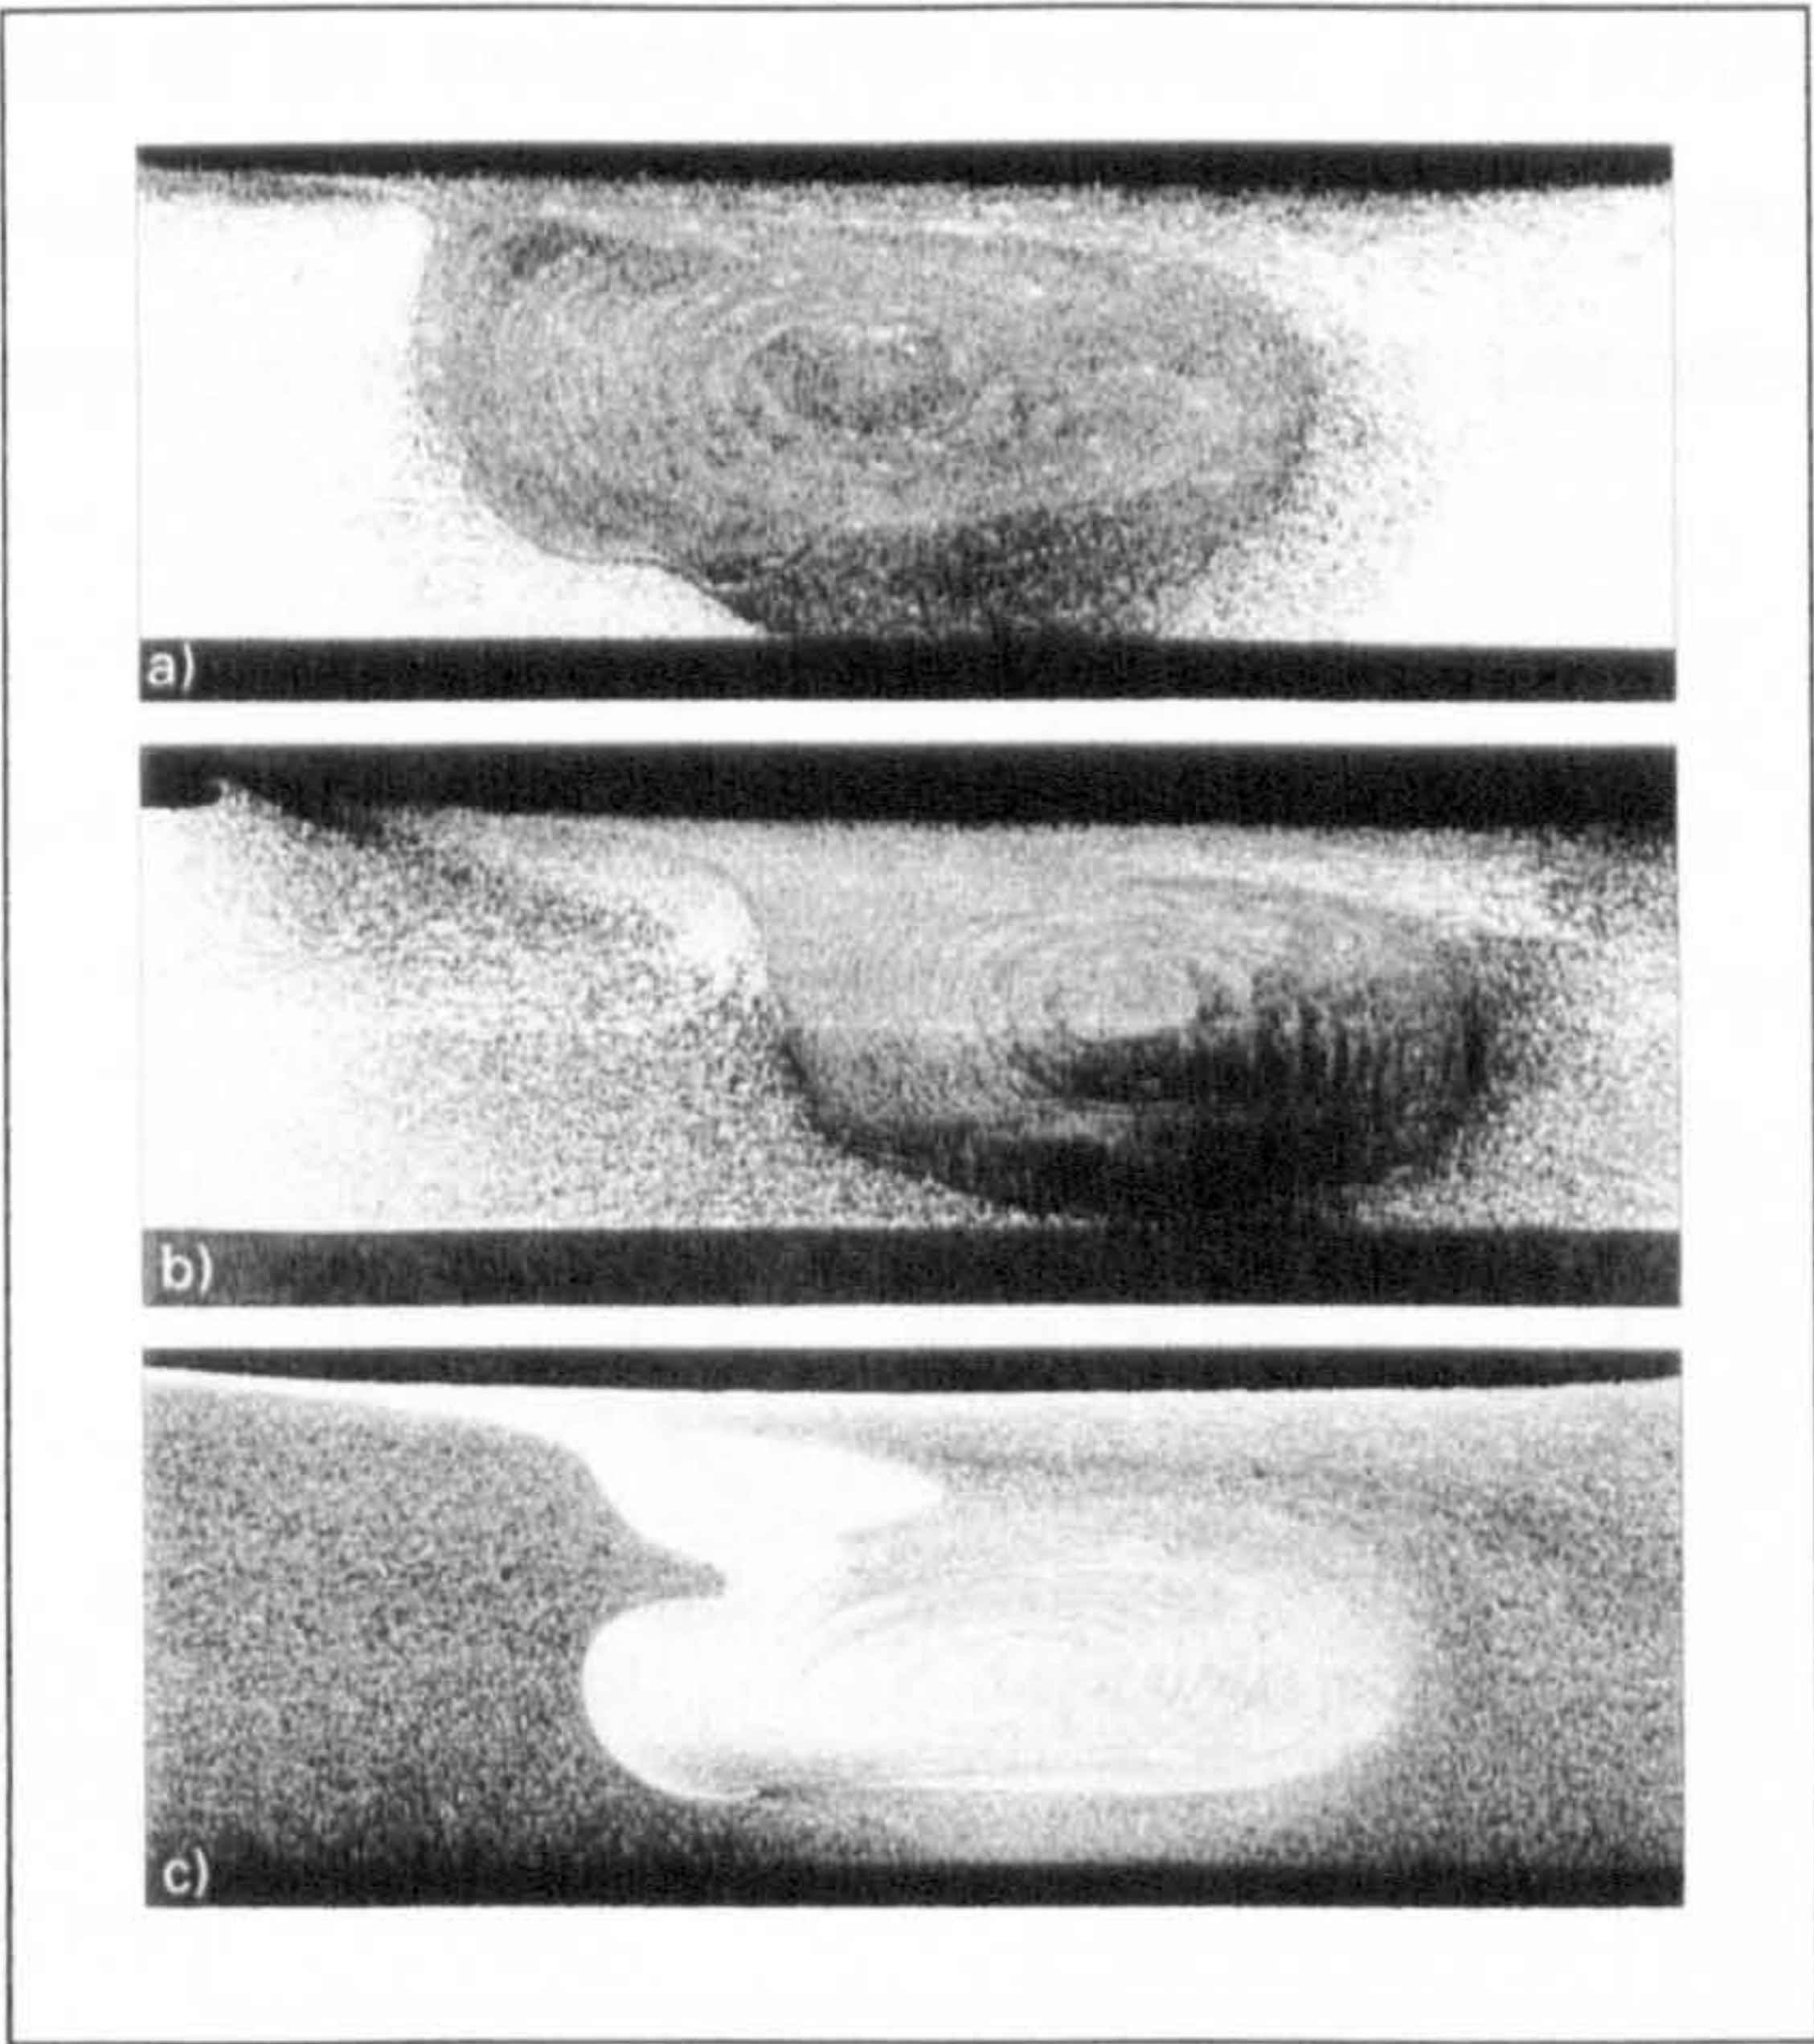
Typical macrosections from friction stir welds in 6.4 mm thick materials: a) AA 7075-T7351, b) AA 2014-T6 and c) AA 5083-H321¹.
